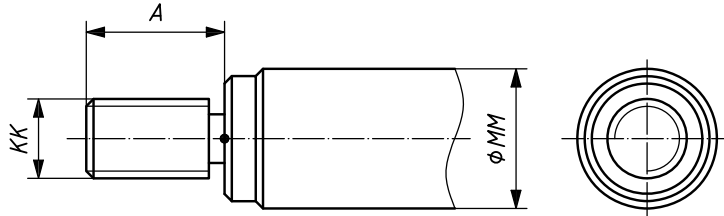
Male thread with shoulder for hydraulic cylinder piston rods
